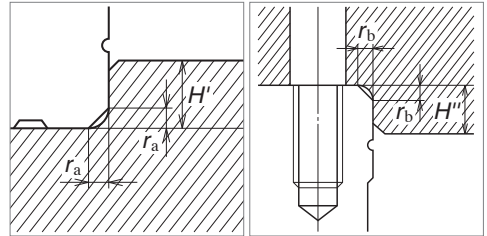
Shoulder for the rail datum face Fig. 9.11 Shoulder for the slide datum face
